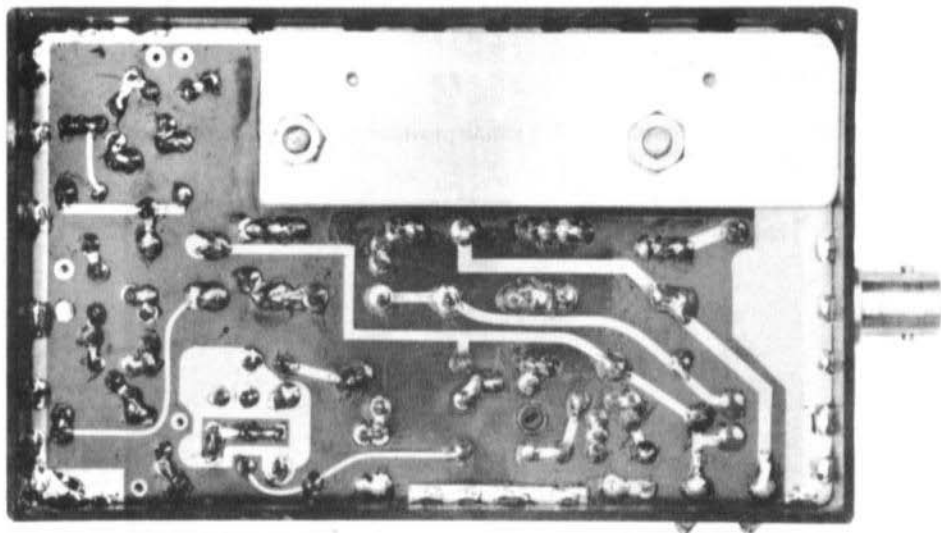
Lower side of the prototype DJ 6 ZZ 006
